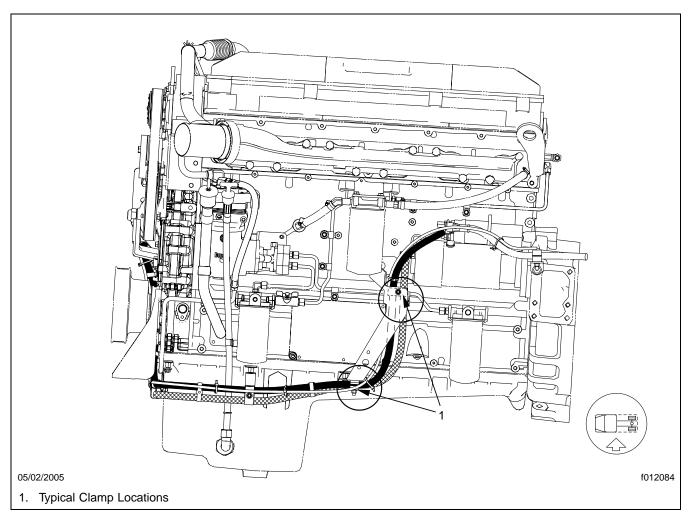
, Left Side of Engine, Showing Typical Clamp Locations
